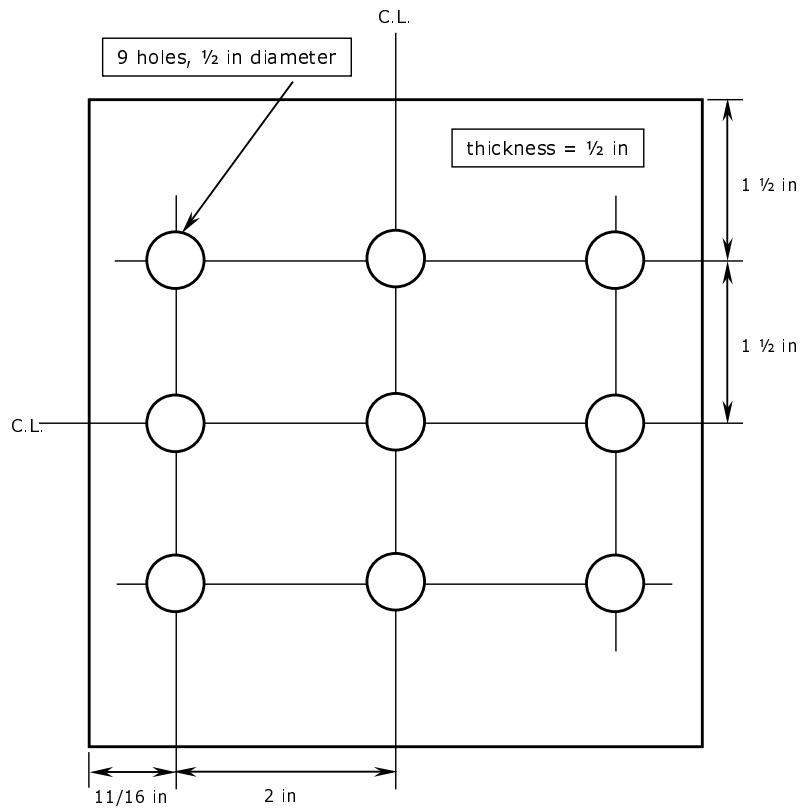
Specimen Layout and Dimensions (Ulloa, 2002a)
